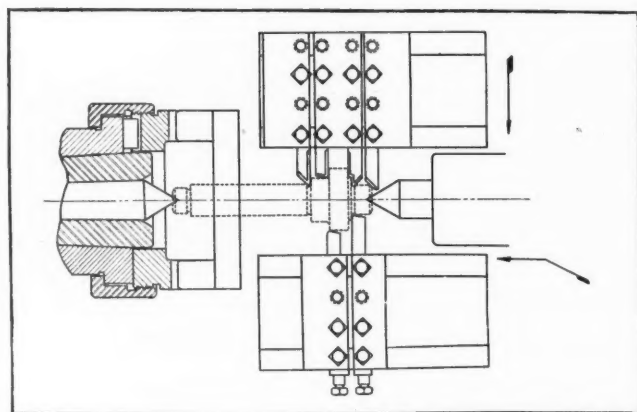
Tooling Equipment provided for the First Operation on a Transmission Shaft
